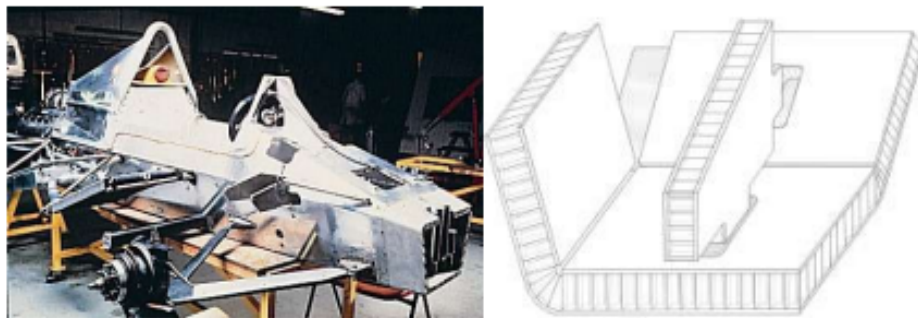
Cut and Fold Aluminium honeycomb chassis from the late 1970s.
